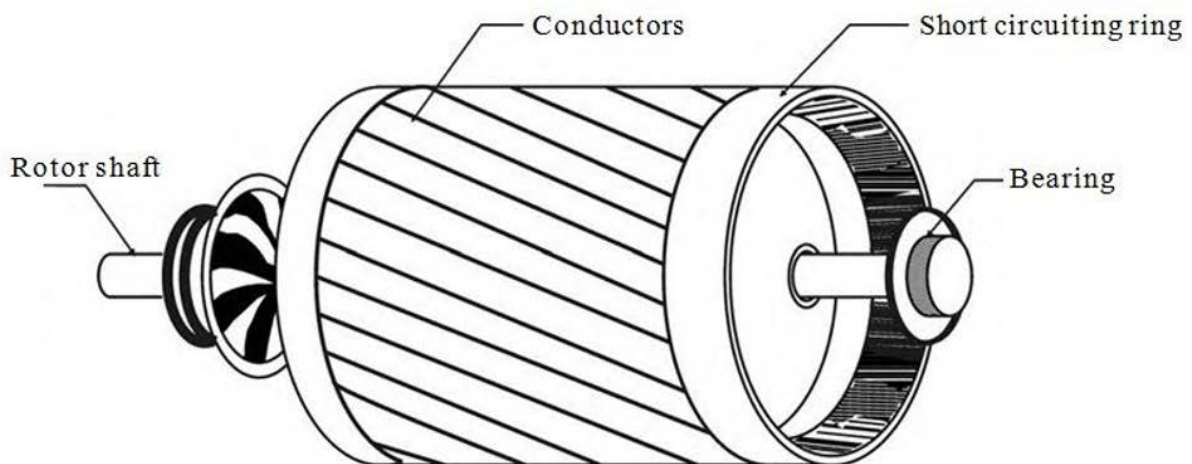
Schematic drawing of a squirrel cage AC motor's rotor (source: www.theengineeringprojects.com)
